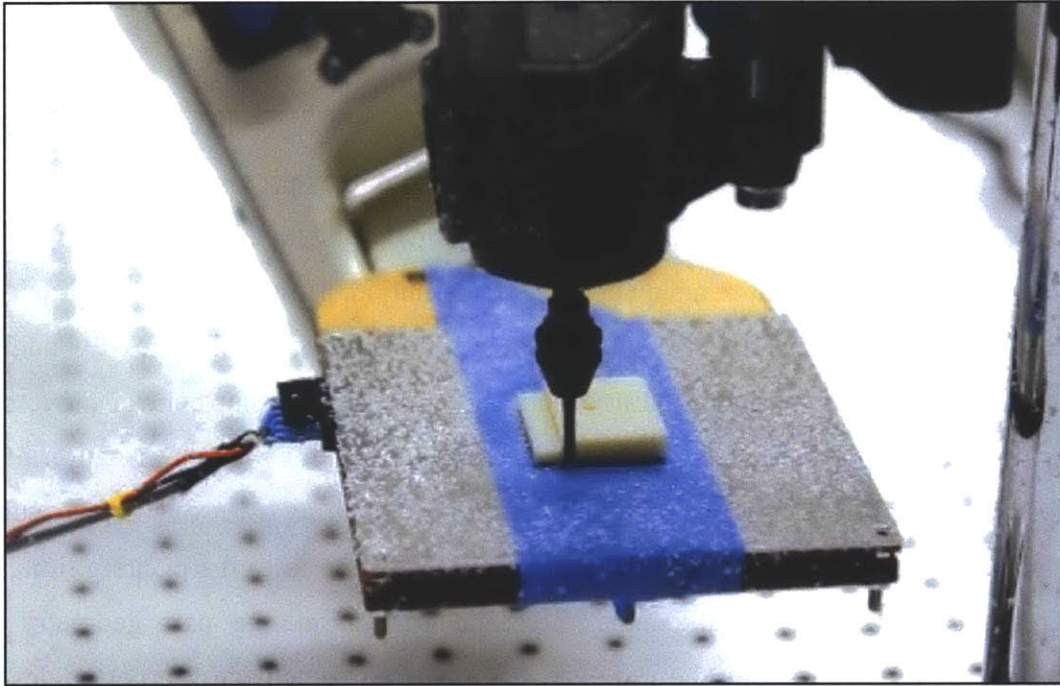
The milling process allows a 3D printed object to have a better finish and tighter tolerances. With the combination configuration, the 3D printed object is already fixtured and calibrated on the build platform to enable milling without re-alignment.
